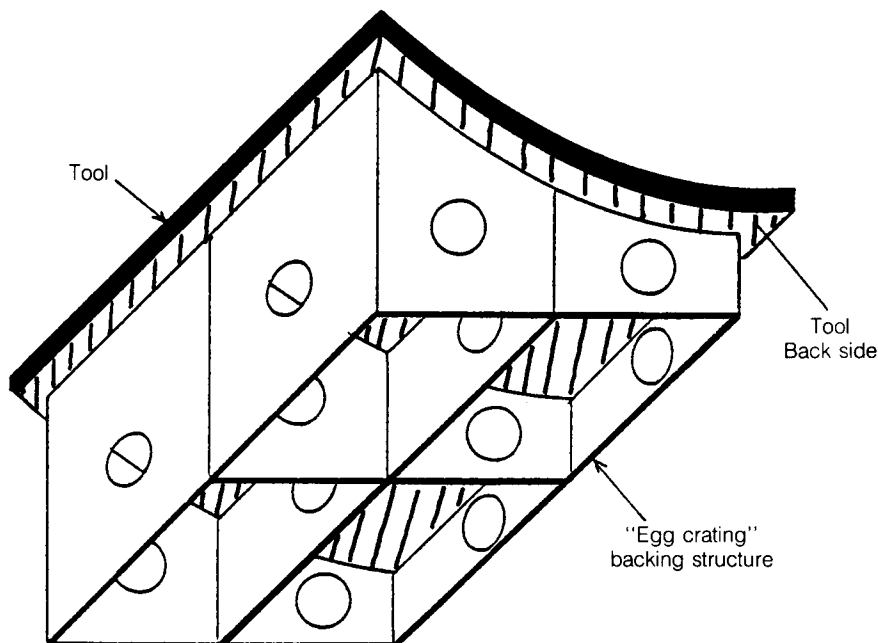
Underneath View of a Tool to Illustrate "Egg Crating". Multiple Holes Allow Gas Flow to Rear of the Mold Surface.
